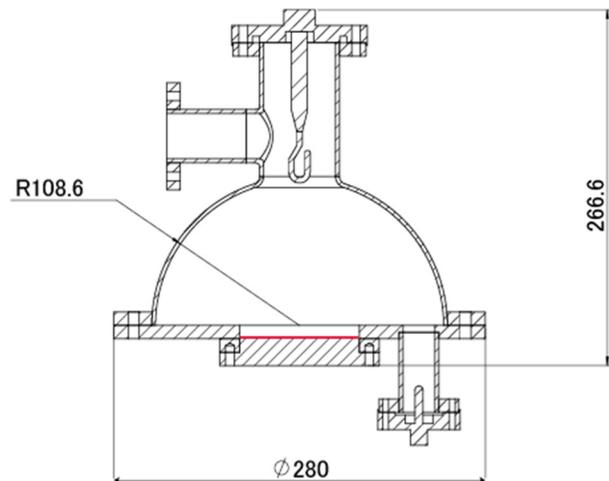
Cross-sectional drawing of mushroom-shaped Nb cavity. (Red line shows sample surface.)
